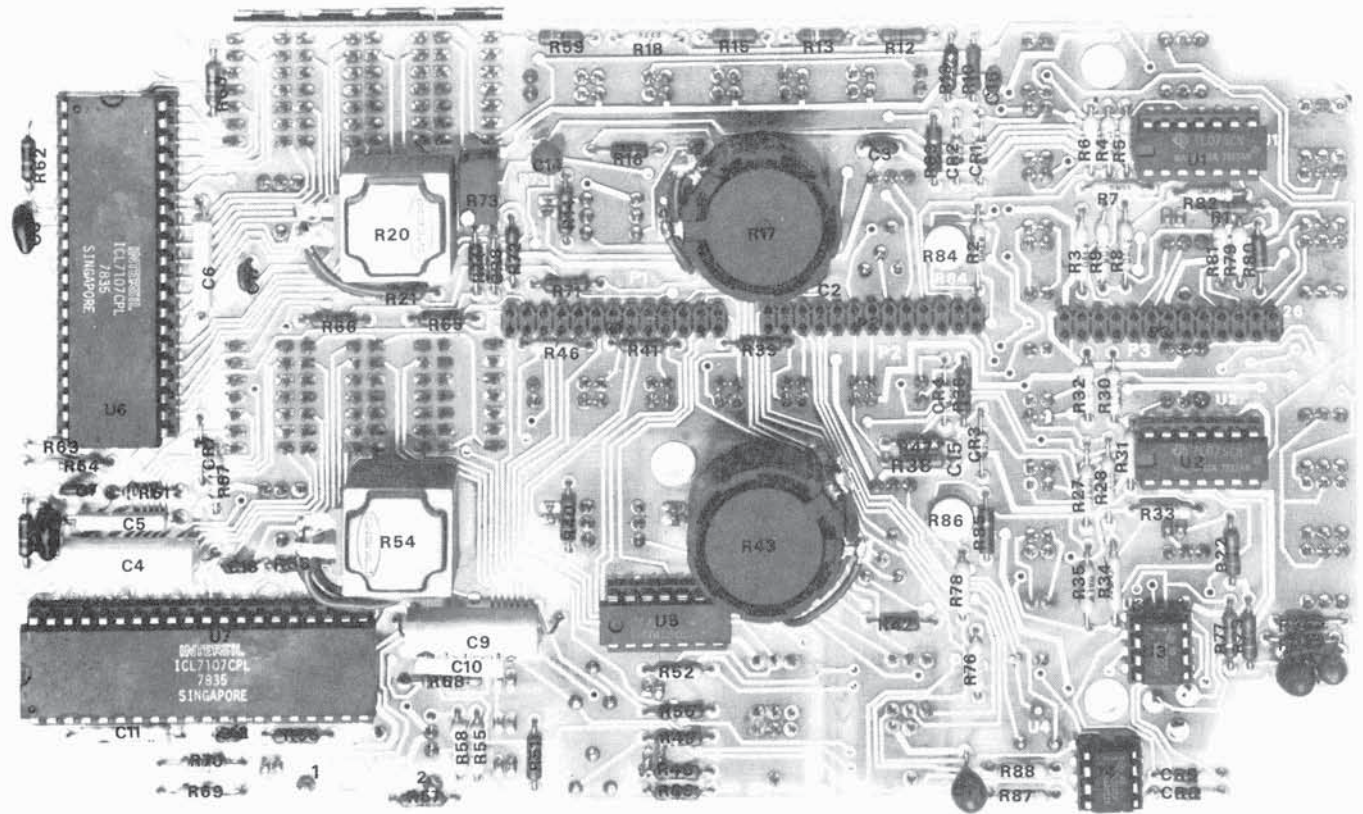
, Front Panel (A1) PCB Parts Locator Diagram Sheet 1.
